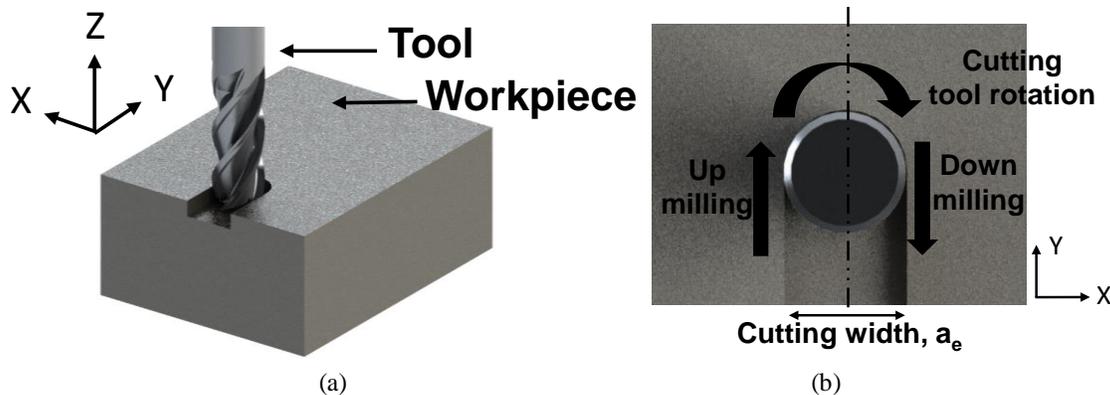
(a) Geometry of end milling process (b) Top view of slot cutting
